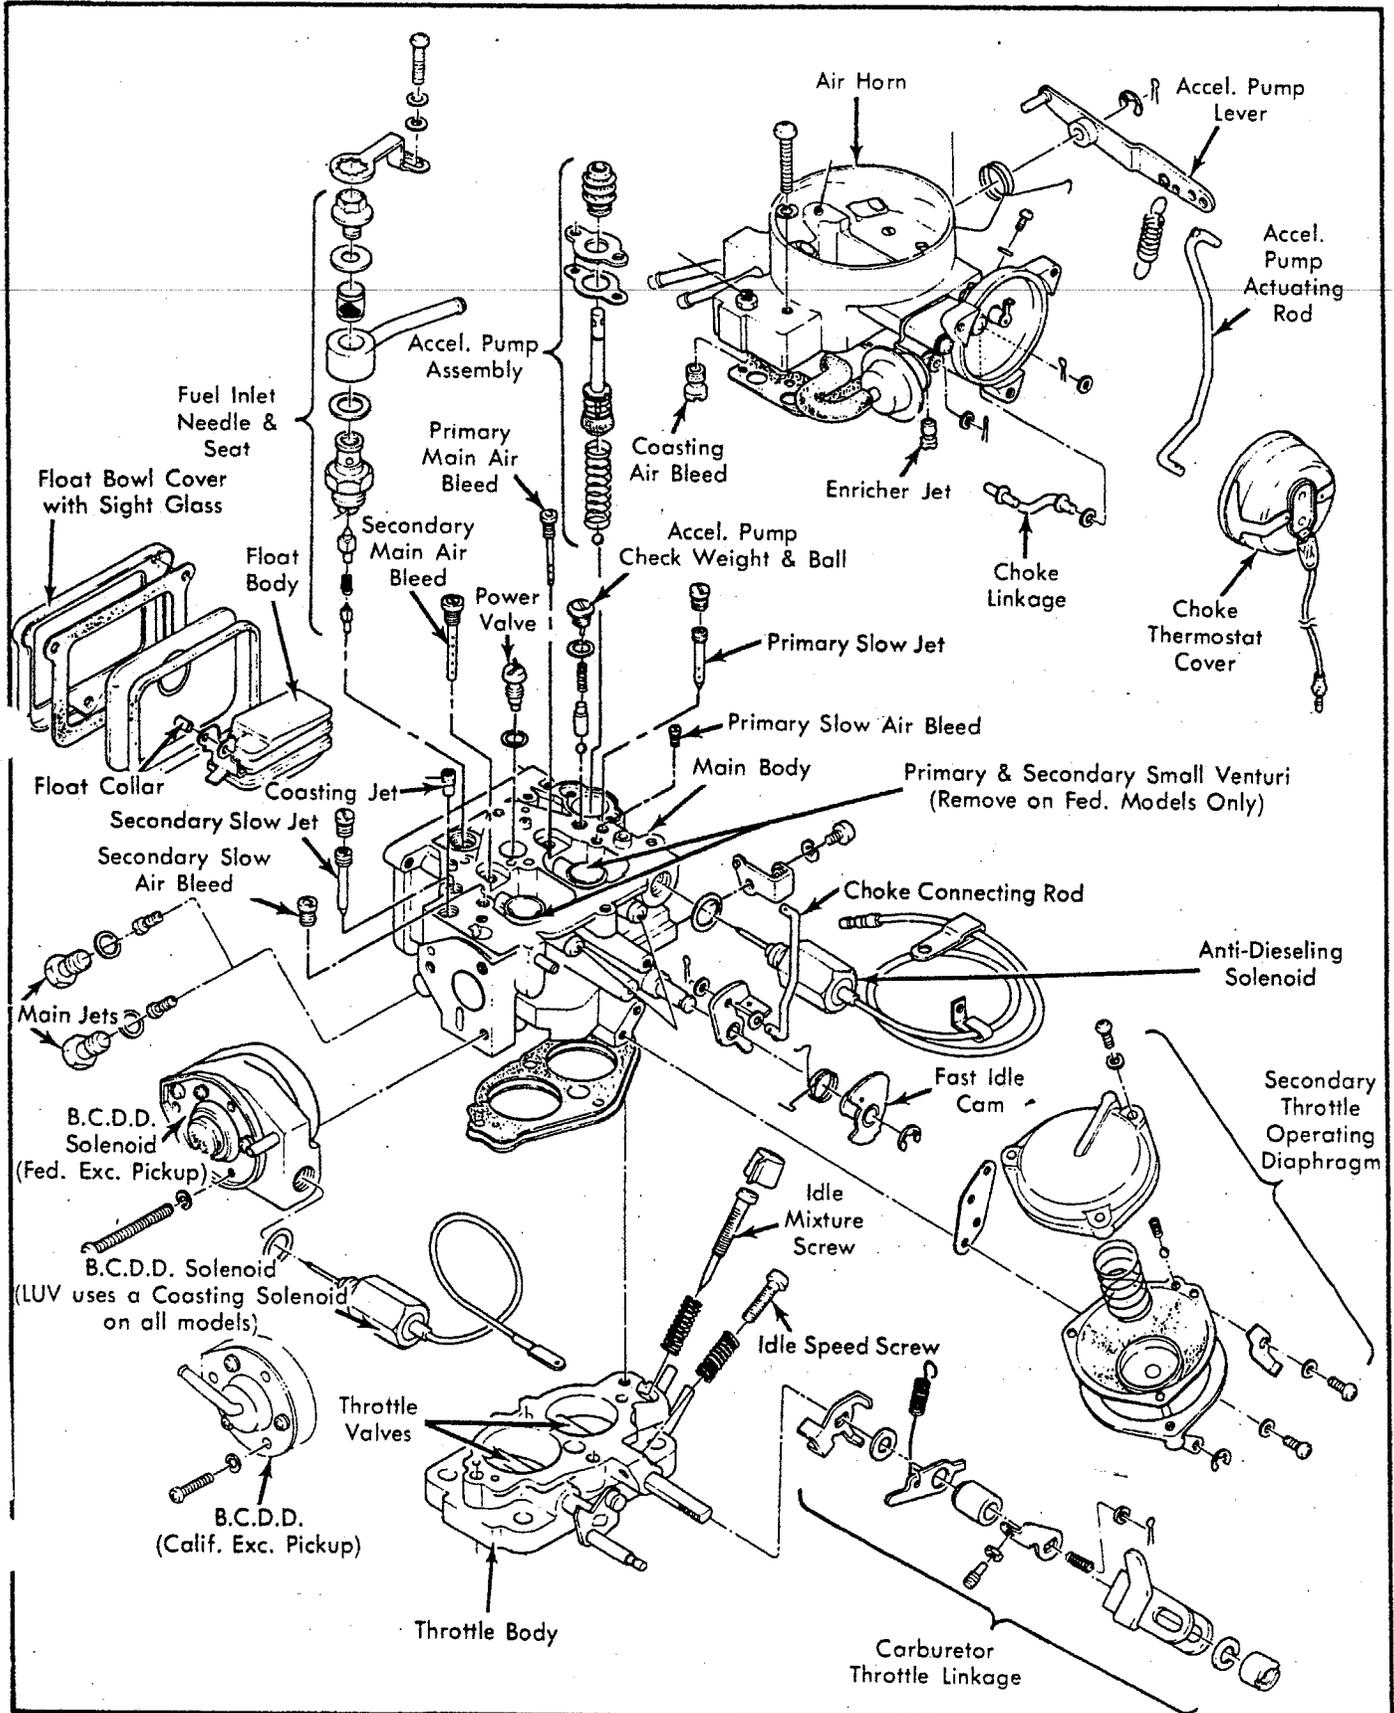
Exploded View of Hitachi DCH Carburetor Assembly
